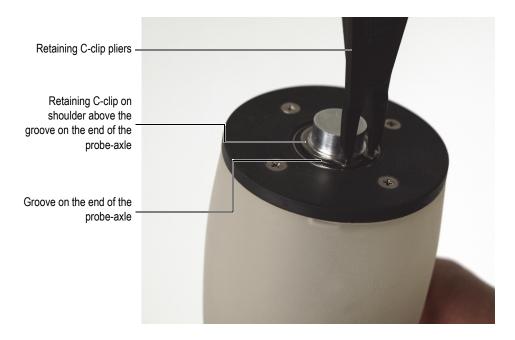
Installing the external retaining C-clip on the probe-axle end
